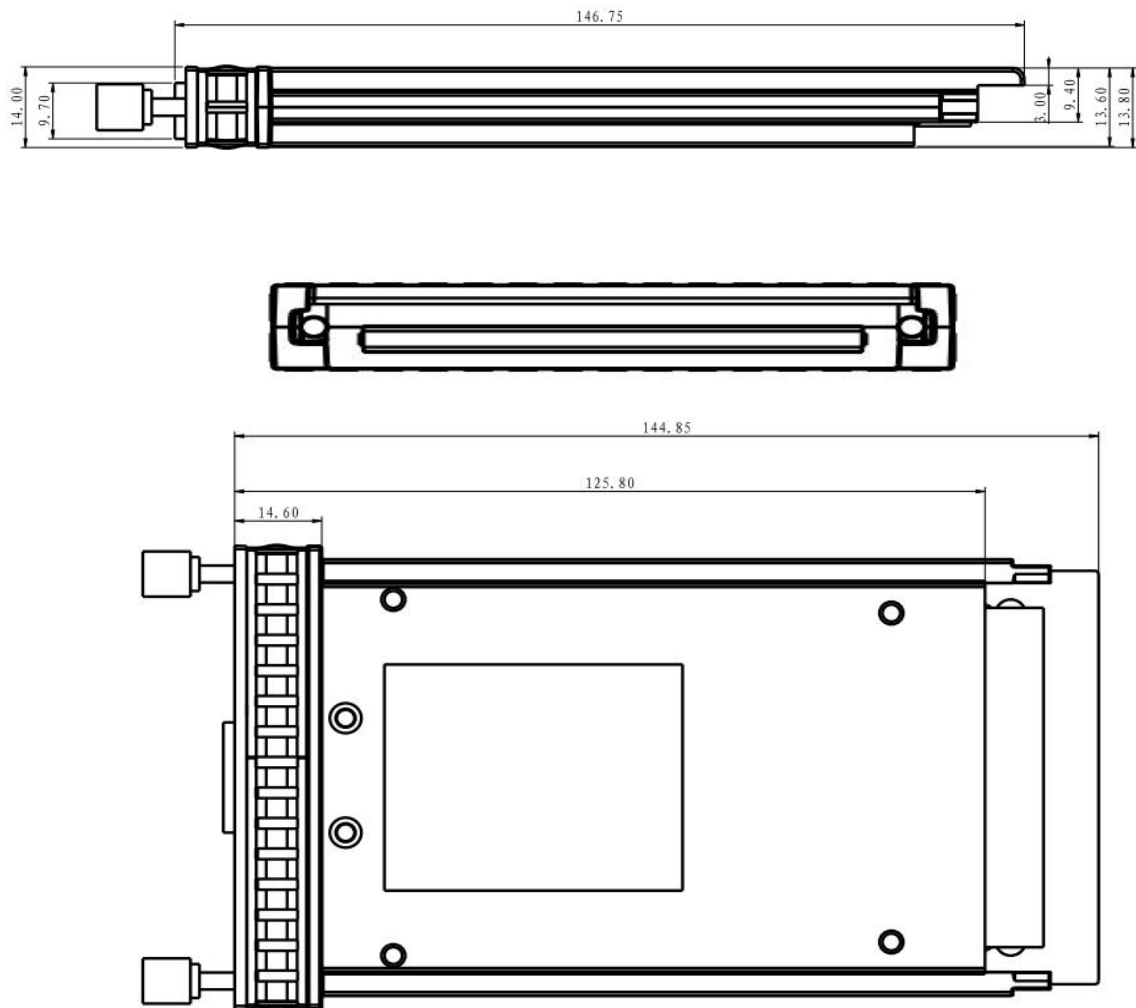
Gb/s CFP Mechanical Dimensions(unit:mm)
